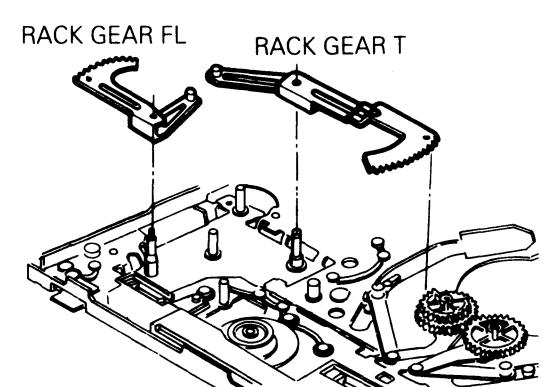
Rack Gear F.L./Rack Gear T
